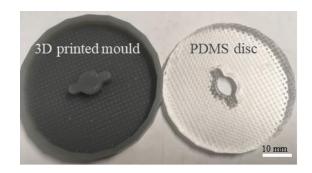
D printed mould in Grey Resin (Formlabs), left, and PDMS disc (46 mm diameter, 4 mm thickness), right, cast from the mould for use in a mini traction machine.
